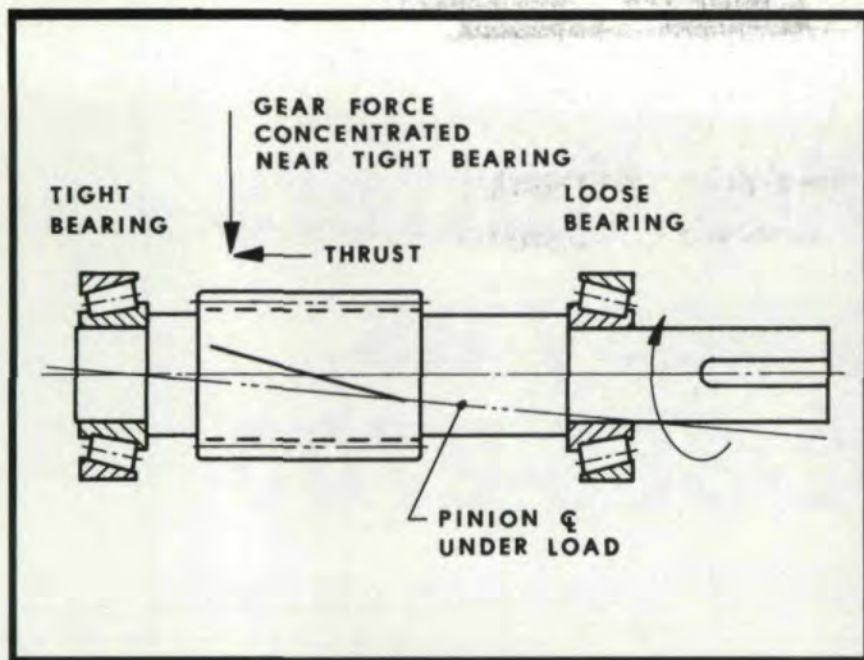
The bearing arrangement of the gearbox in Fig. 6., showing the cause of the failure.
